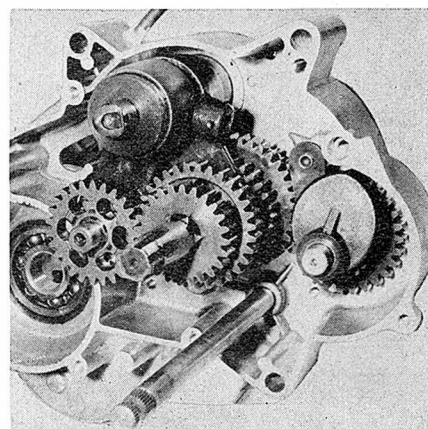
A—View of transmission gears and shafts installed in the right crankcase half.
